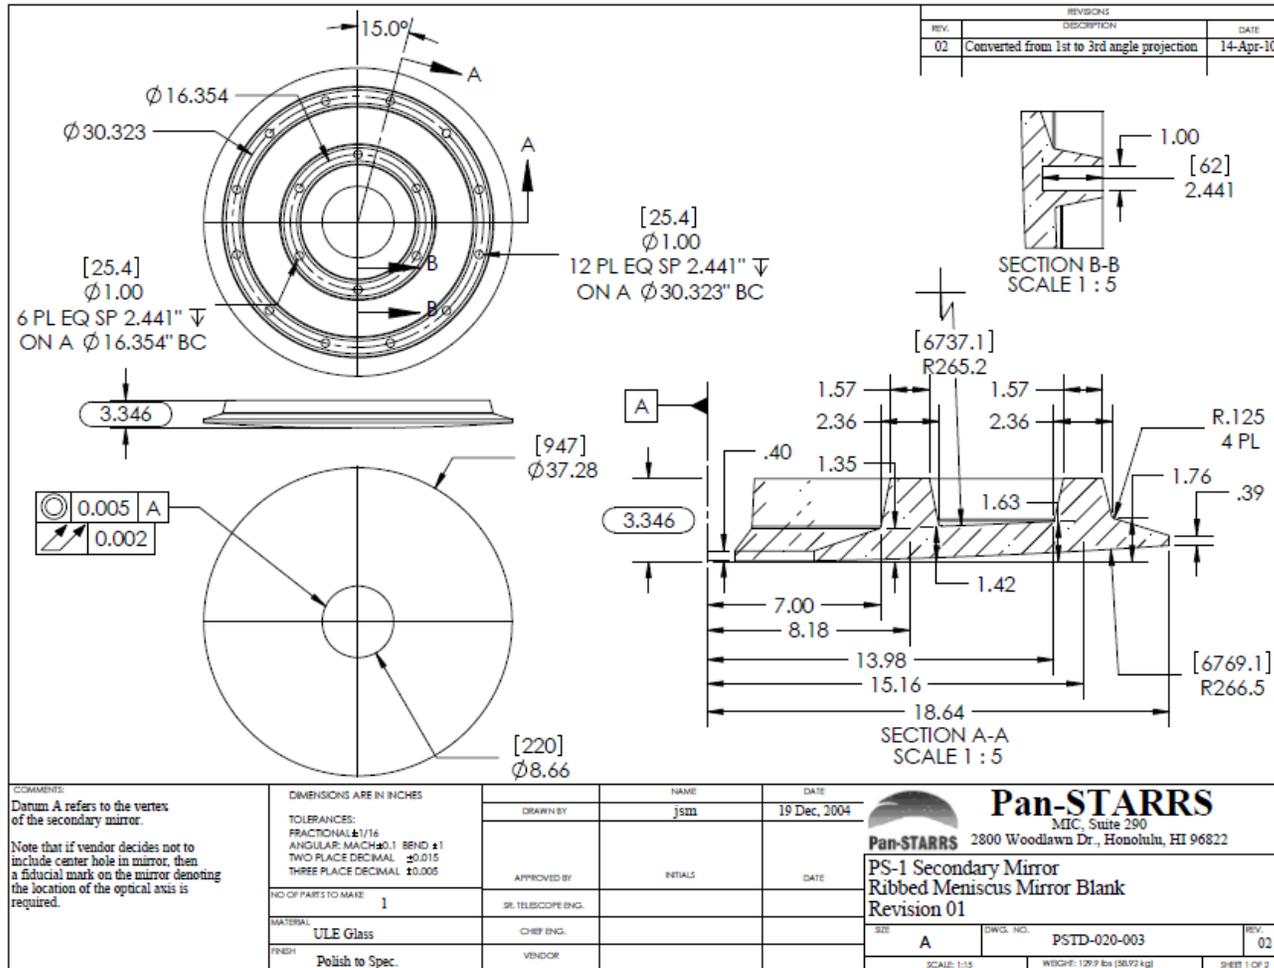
The PS1 Secondary Mirror Blank Dimensions
